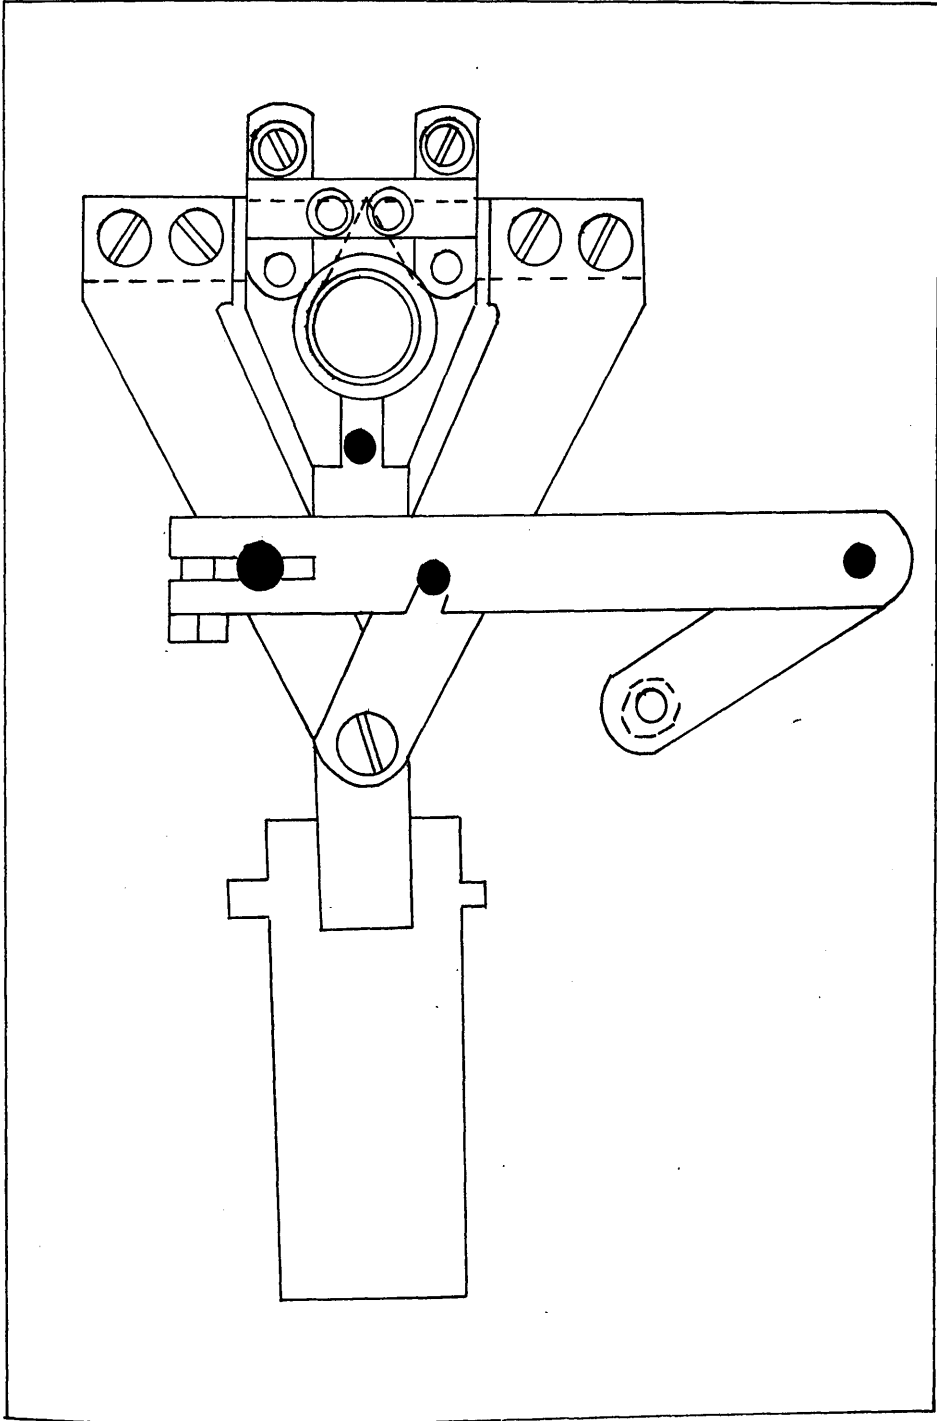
PLATFORM FOR TUFT ANCHORAGE TESTING - CLOSED POSITION
